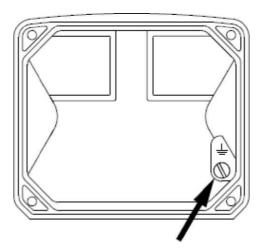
Grounding aluminum enclosure with type PM 115-230V A.C.
